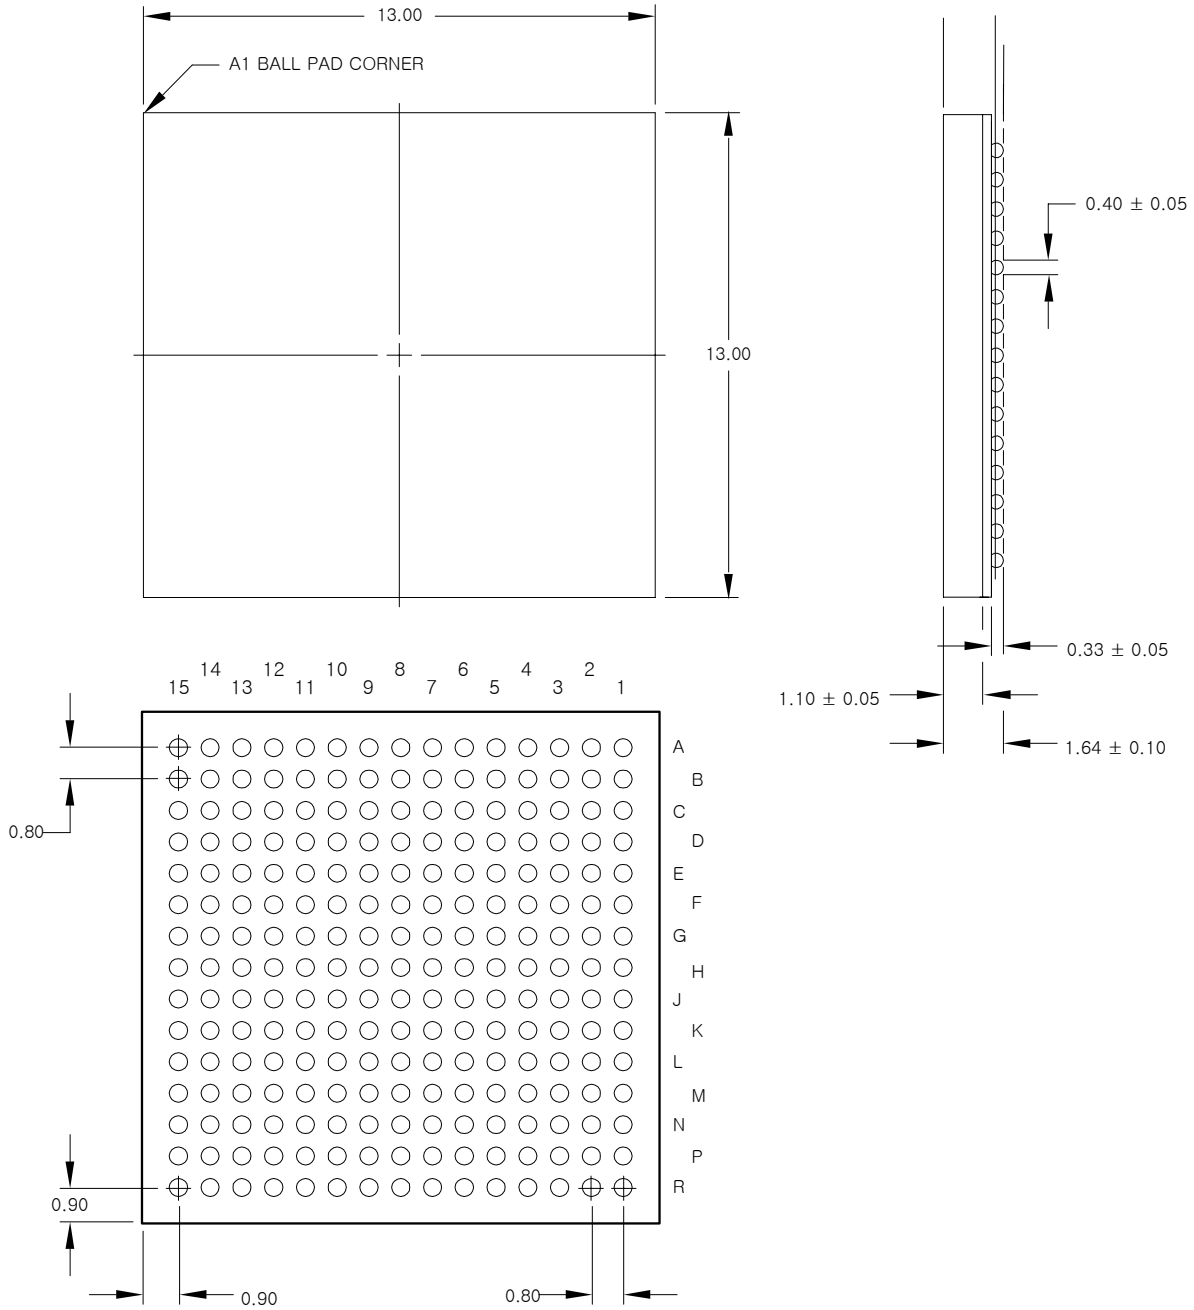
TCC767 Package Dimension (225-FPBGA-1313)
